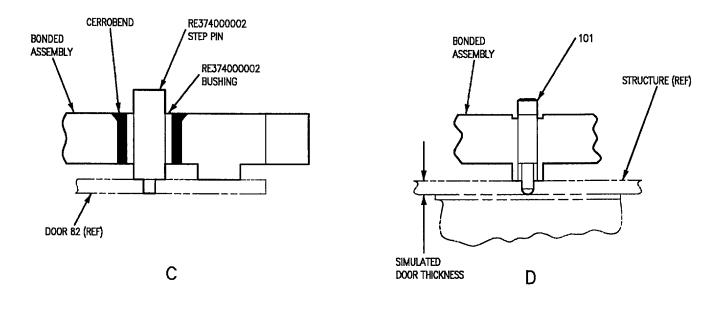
Installation of Plate Set for Drilling Door 82 Substructure (Sheet 2)
